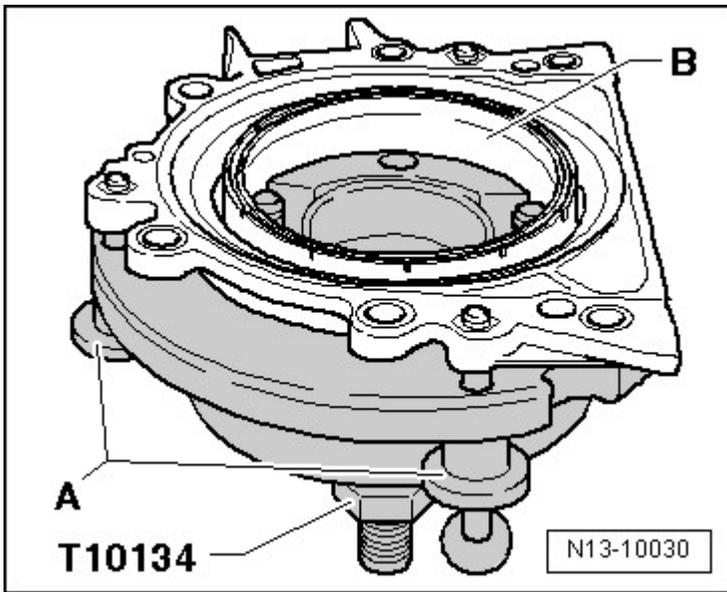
Identifying Sealing Flange And Sealing Lip Support Ring Pressed On Assembly Tool T10134
